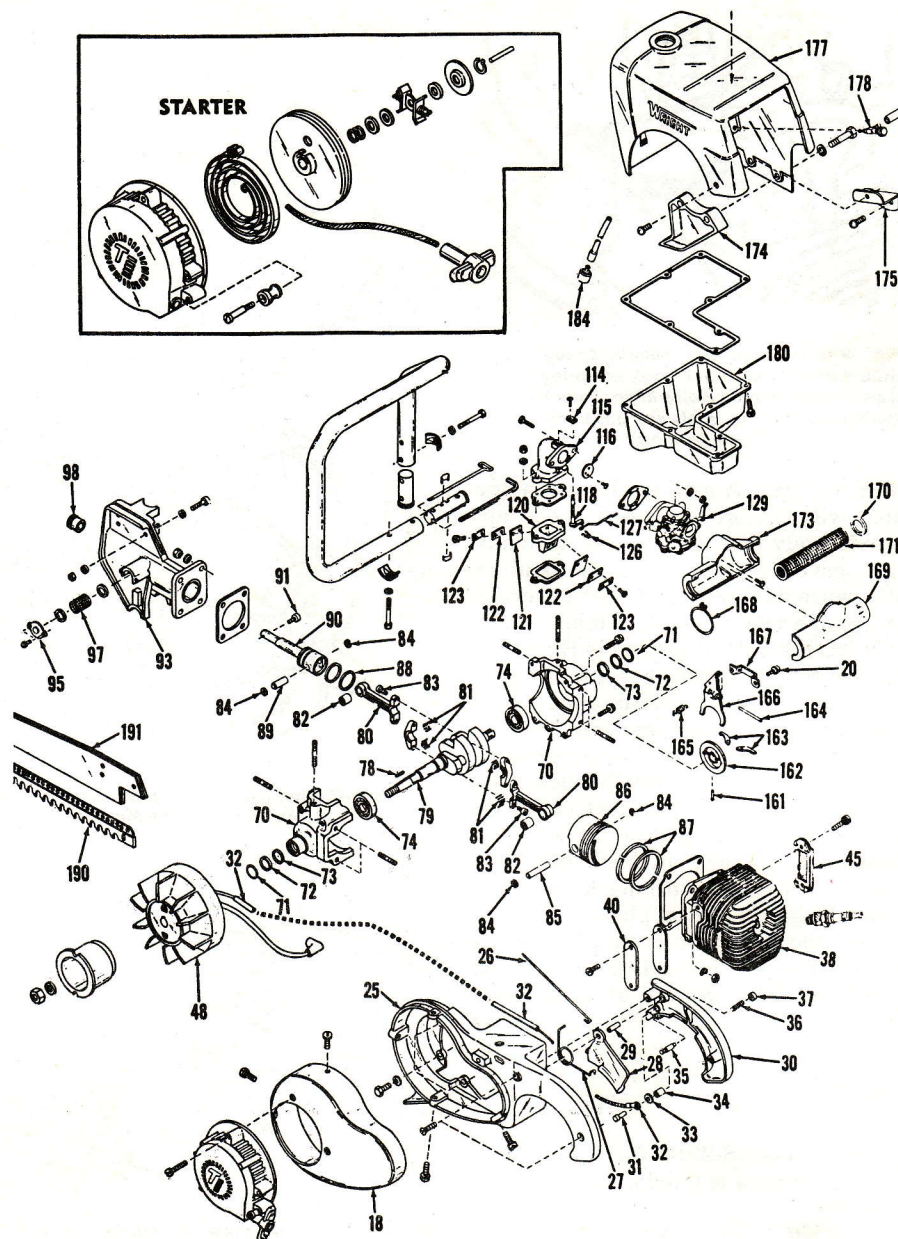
Exploded view of Wright GS-5020A blade saw. Models GS-4520, GS-5020 and B520 are basically similar.
